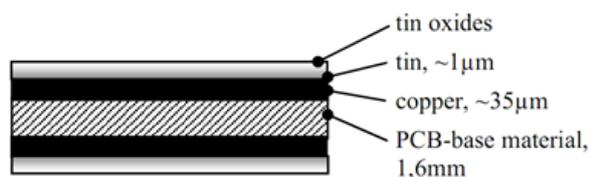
Cross section of a typical PCB configuration with immersion tin final finish [19]
